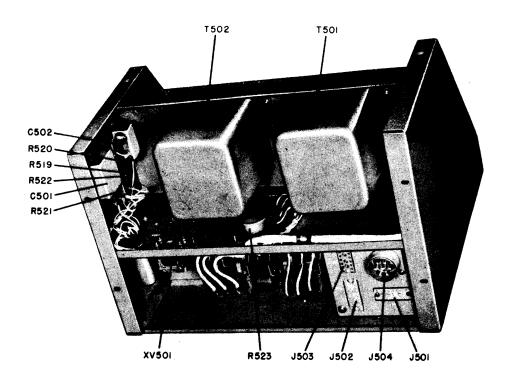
Power Control Assembly, Rear View, Location of Parts
